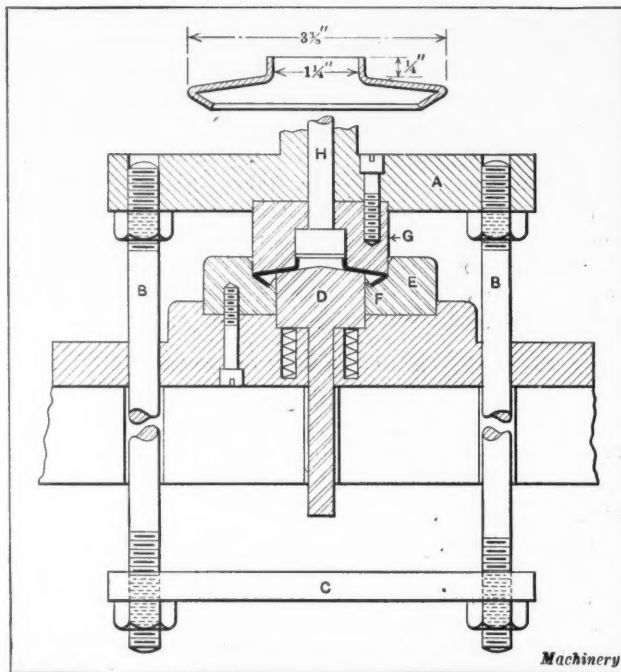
Die in which Flange is formed and Outer Edge is beveled
